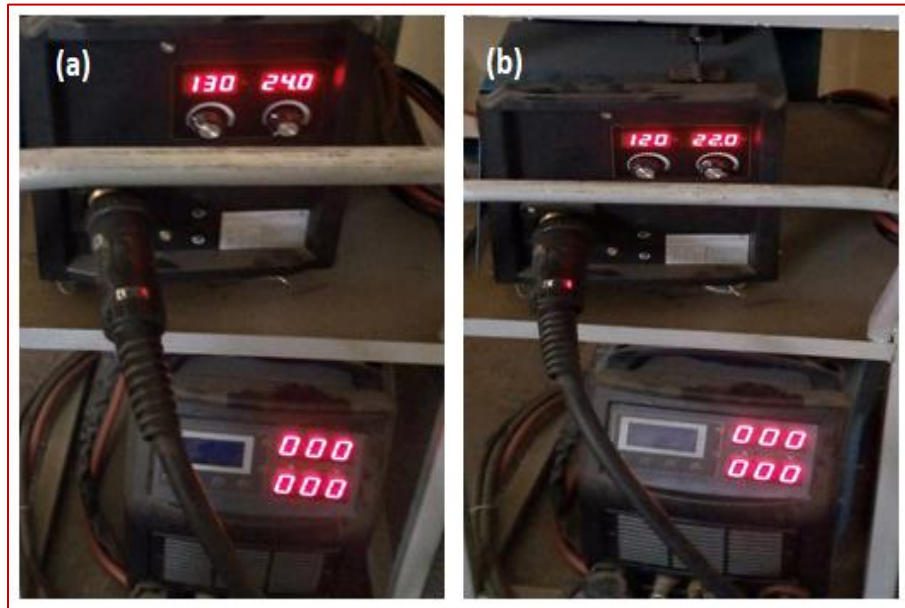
5. Photo of MIG welding machine, (a) current 130 A and (b) 120 A
